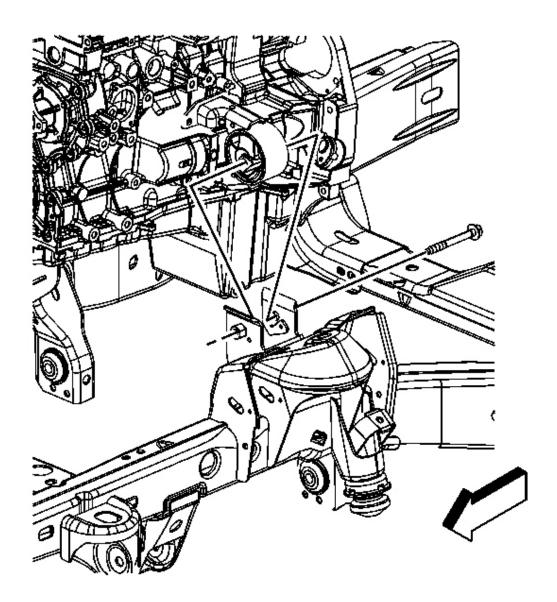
Locating Left Engine Mount-To-Frame Bracket Through Bolt Courtesy of GENERAL MOTORS CORP.
